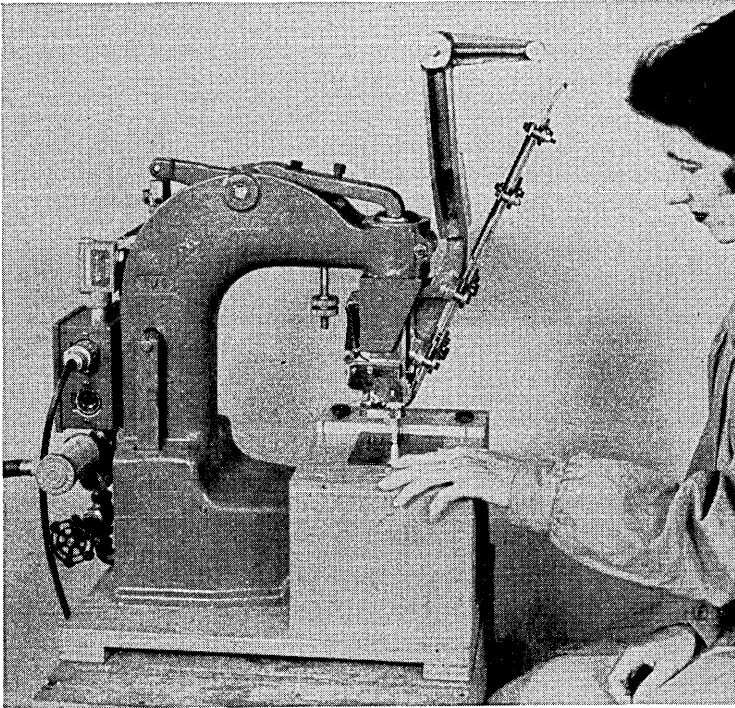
Single attaching head requiring manual indexing and actuating of inserting fork.
